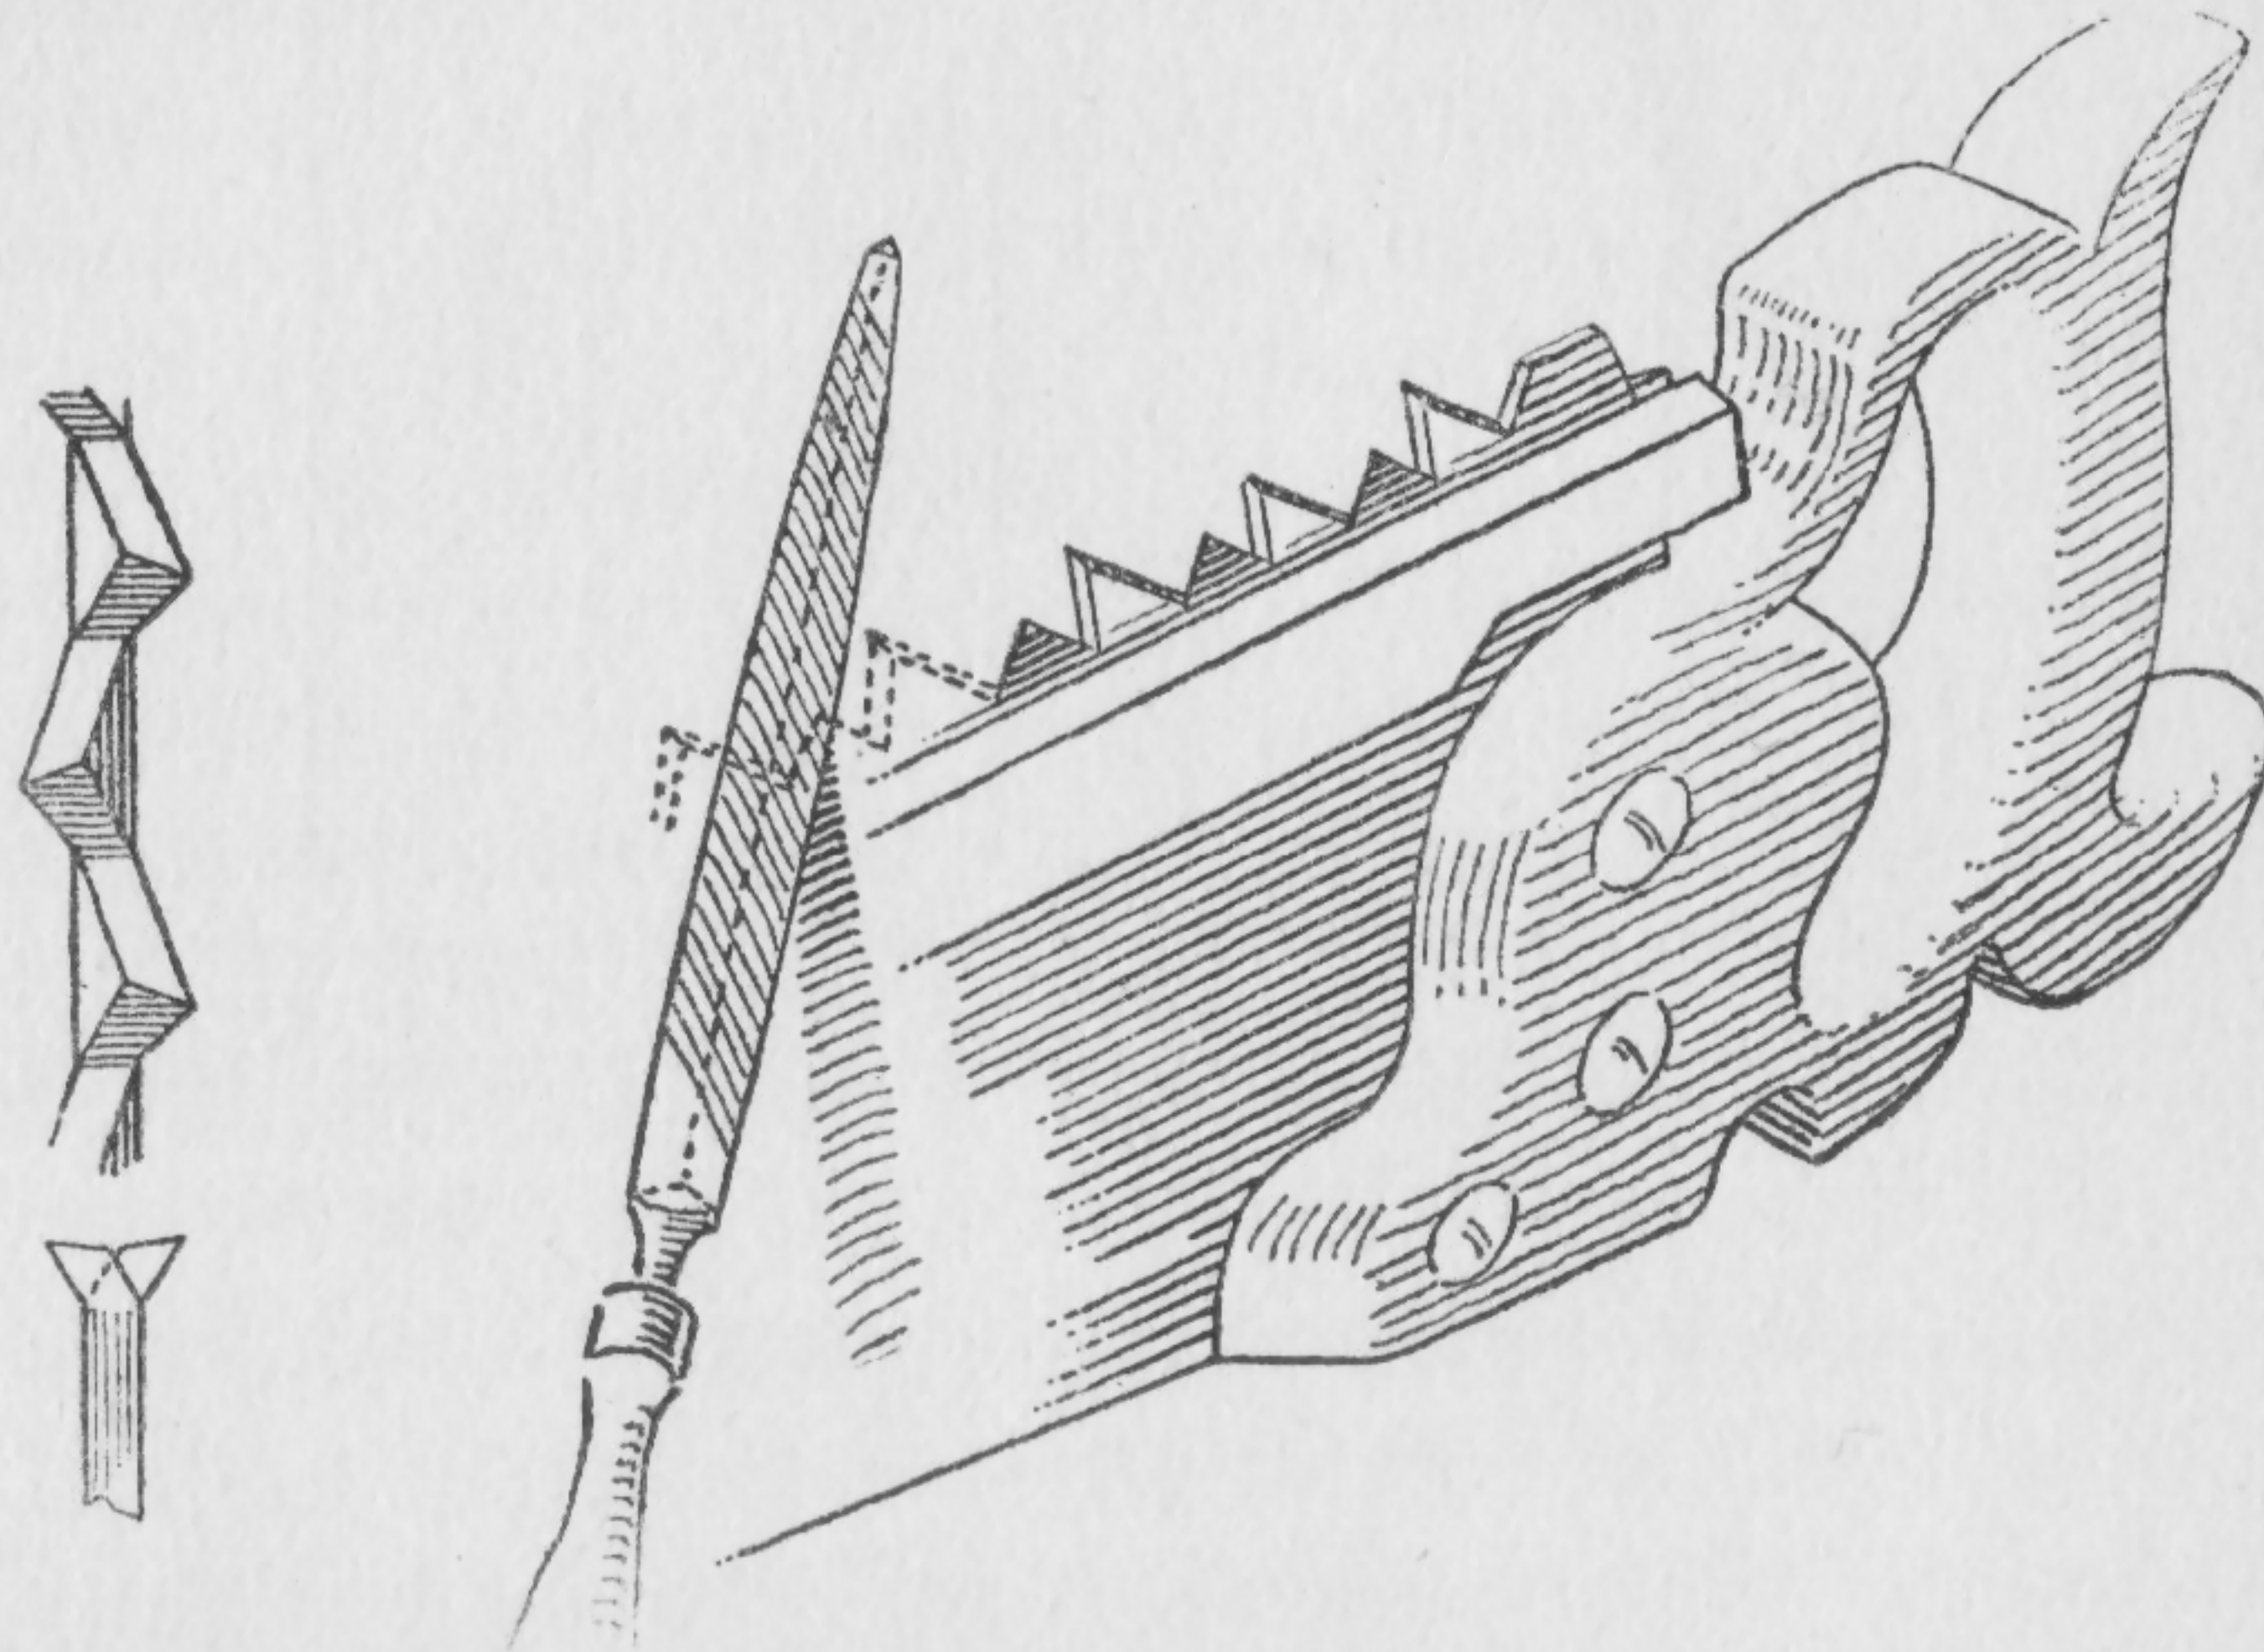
The saw is sharpened by clamping it in a vise or rack between two strips of wood and filing the front edge of the teeth projecting towards the worker. The three-cornered file is held as shown, to produce the cutting edge on the outside of each tooth. When all the alternate teeth have been sharpened, the saw is reversed and the opposite teeth are filed in the same way. The file is always pointed upward and towards the saw handle. At the left is an enlarged view, looking down upon the teeth, and below it a cross section. If the saw needs setting, this is done with a special tool before filing.
